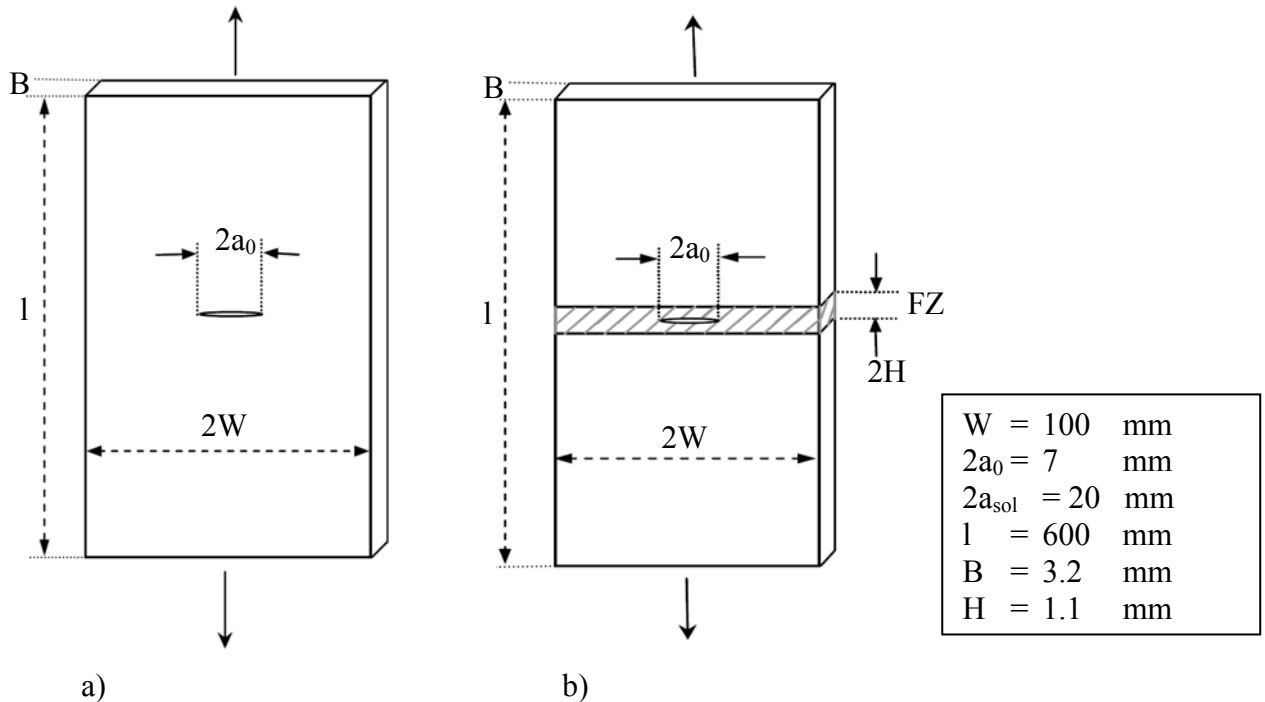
Specimen layout and dimensions of a) base material M(T) specimen and b) laser welded M(T) specimen
